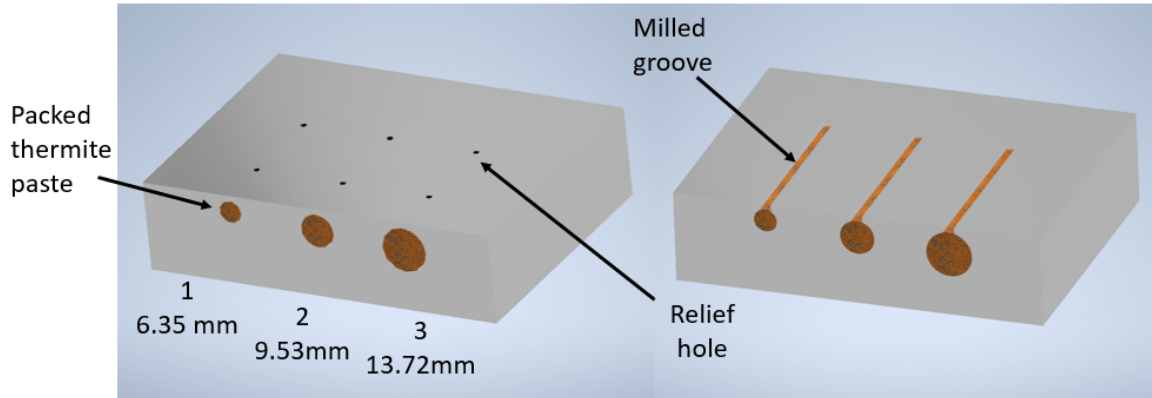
Schematic of thermite packing process. Left: Thermite paste is packed in each channel. Air and water can escape from the relief holes. Right: Milled grooves following paste curing.
